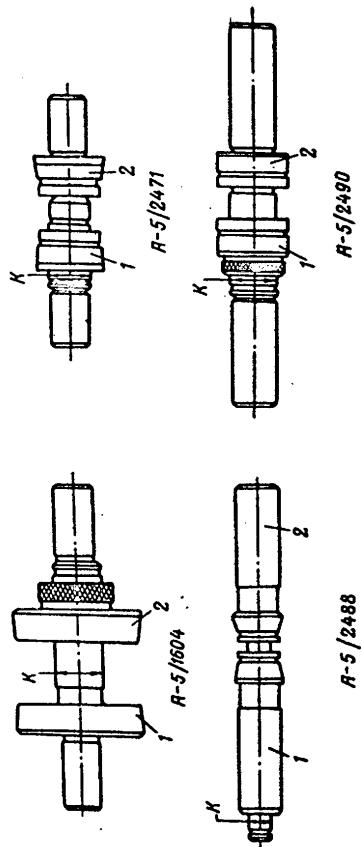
MANDRELS USED FOR CHECKING PARALLEL ALIGNMENT OF MASTER ROD AND ARTICULATED ROD BEARING HOLE AXES AND DISTANCE BETWEEN THEM
